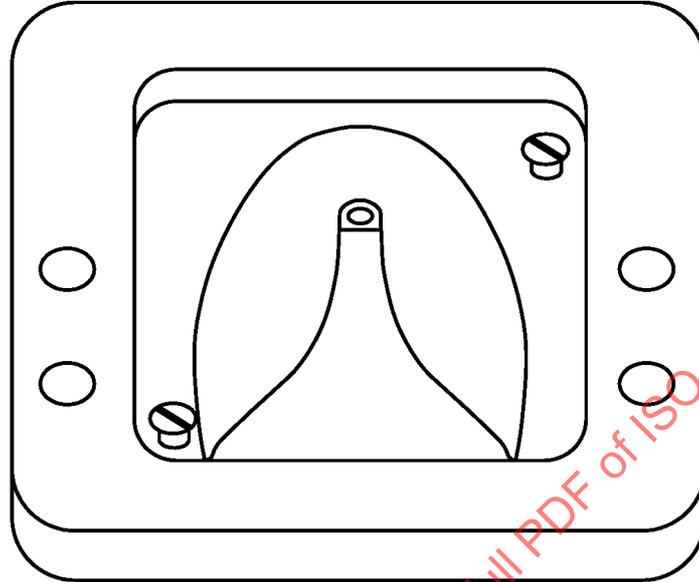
Metal mounting tray with heel in position before addition of molten alloy
